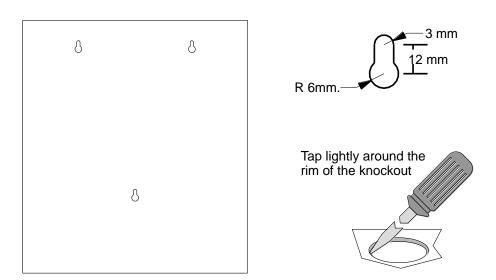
Example FireFinder Back Pan Mounting Hole & Removing Knockouts
